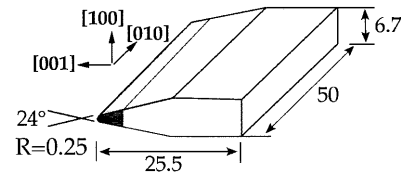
Thermal fatigue specimen geometry and dimensions.
